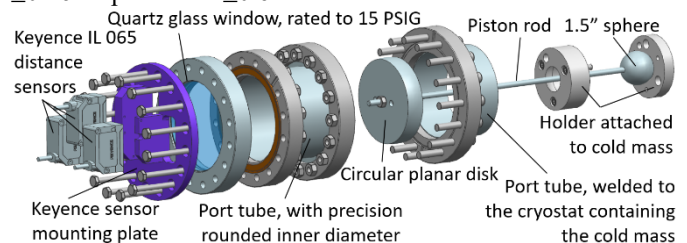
Mechanical Assembly of the Cold Mass Positioning System. Three Keyence IL 065 sensors on a mounting fixture survey a circular planar disk gliding free inside a precision rounded port tube, sealed to vacuum by a fused Quartz Silica window. A piston rod connects the circular planar disk to a 1.5" sphere affixed to the cold mass. Displacements of the sphere with respect to the port tube result in a tilt, roll, yaw or longitudinal displacement of the planar disk. From the three Keyence sensors, the actual displacement can be calculated. The Flange size is a standard ConFlat CF6", all parts are made from 316L steel, except for the 1.5" sphere and cold mass holder which are constructed from the same 6061-aluminum used for the cold mass.
